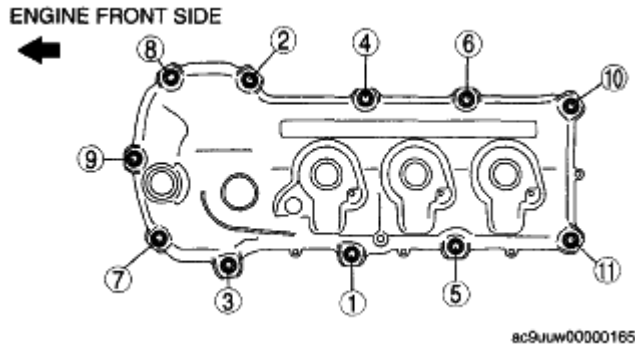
Identifying Cylinder Head Cover Bolt (RH) Tightening Sequence
